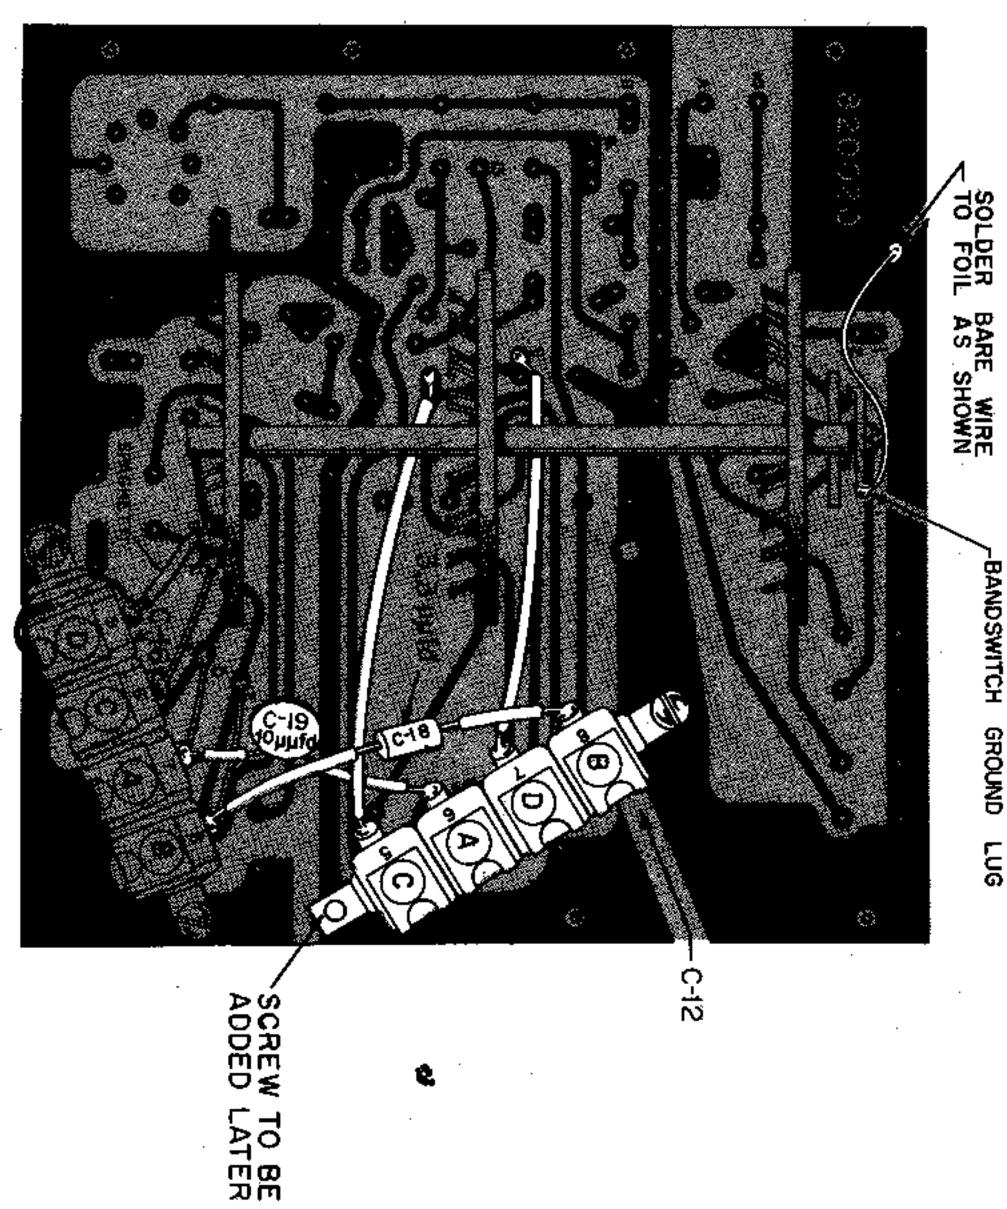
MOUNTING C-16 (TRIMMER STRIP)
